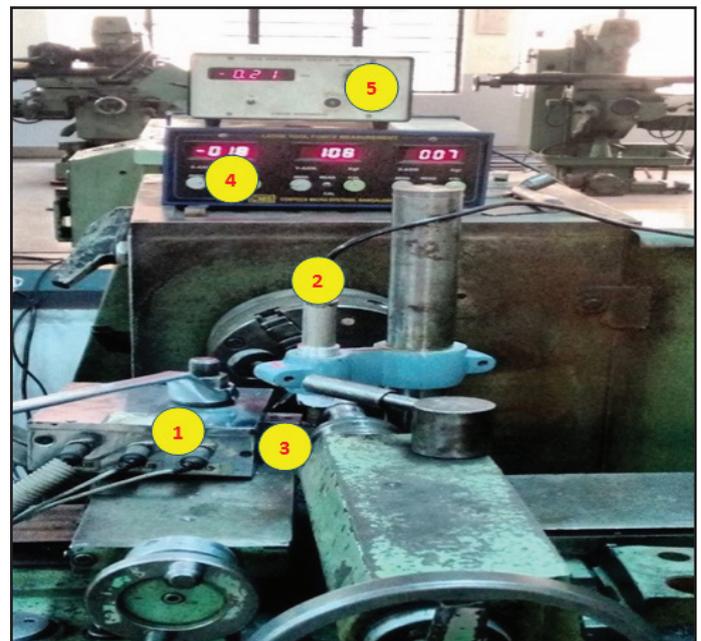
Experimental Test Rig for Condition Monitoring of Lathe Tool During Turning Operation (1) Lathe Tool Dynamometer (2) LVDT Sensor Placed on Tool Tip (3) Cutting Tool and Fixture in Lathe Tool Dynamometer (4) Analog Read Out for Cutting Forces (5) Analog Read Out for Tool Tip Displacements
